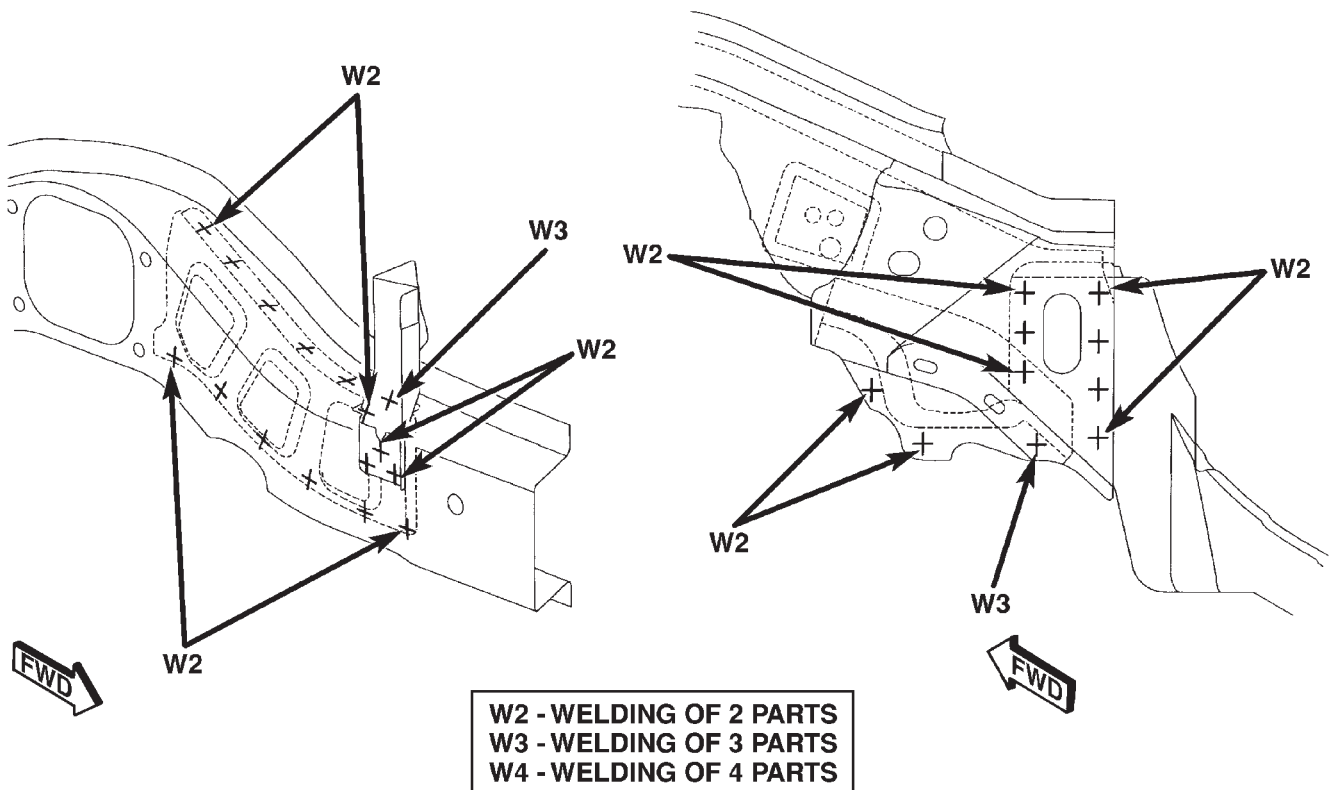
FRONT SUSPENSION CROSSMEMBER BRACKET TO FRONT SIDE RAIL REINFORCEMENT TO FRONT SIDE RAIL
